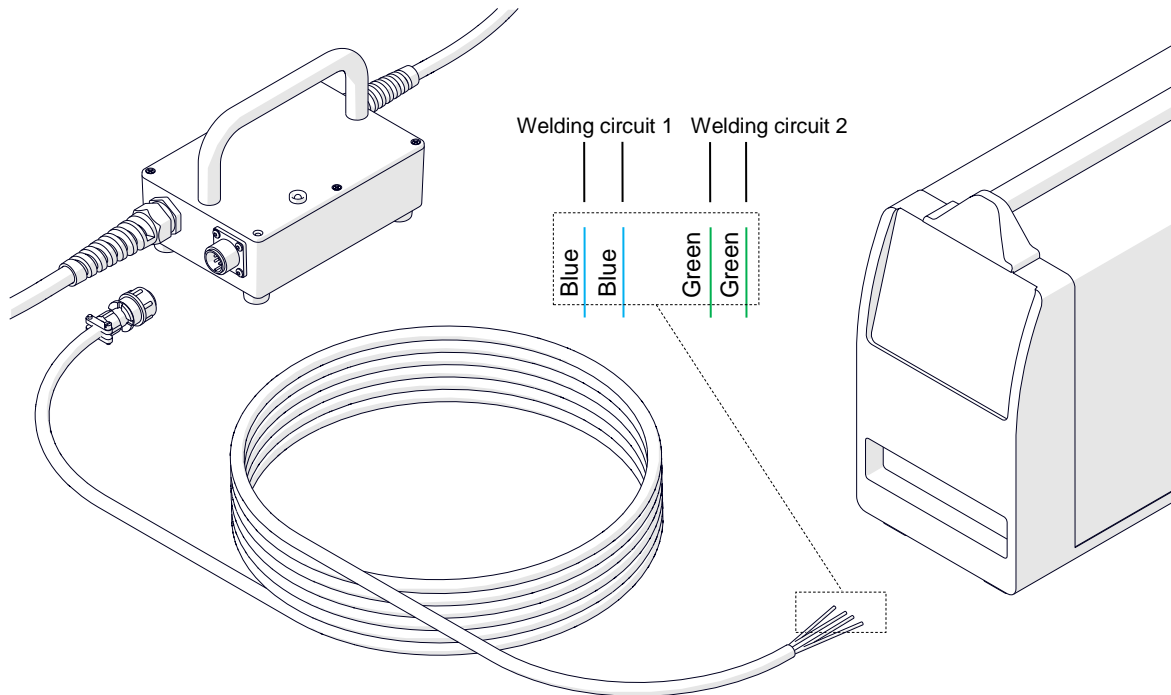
Connecting the arc ignition cable to welding circuits
